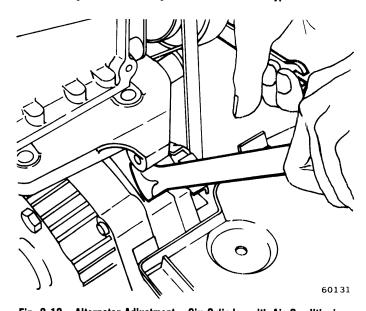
Alternator Adjustment—Six-Cylinder with Air Conditioning
